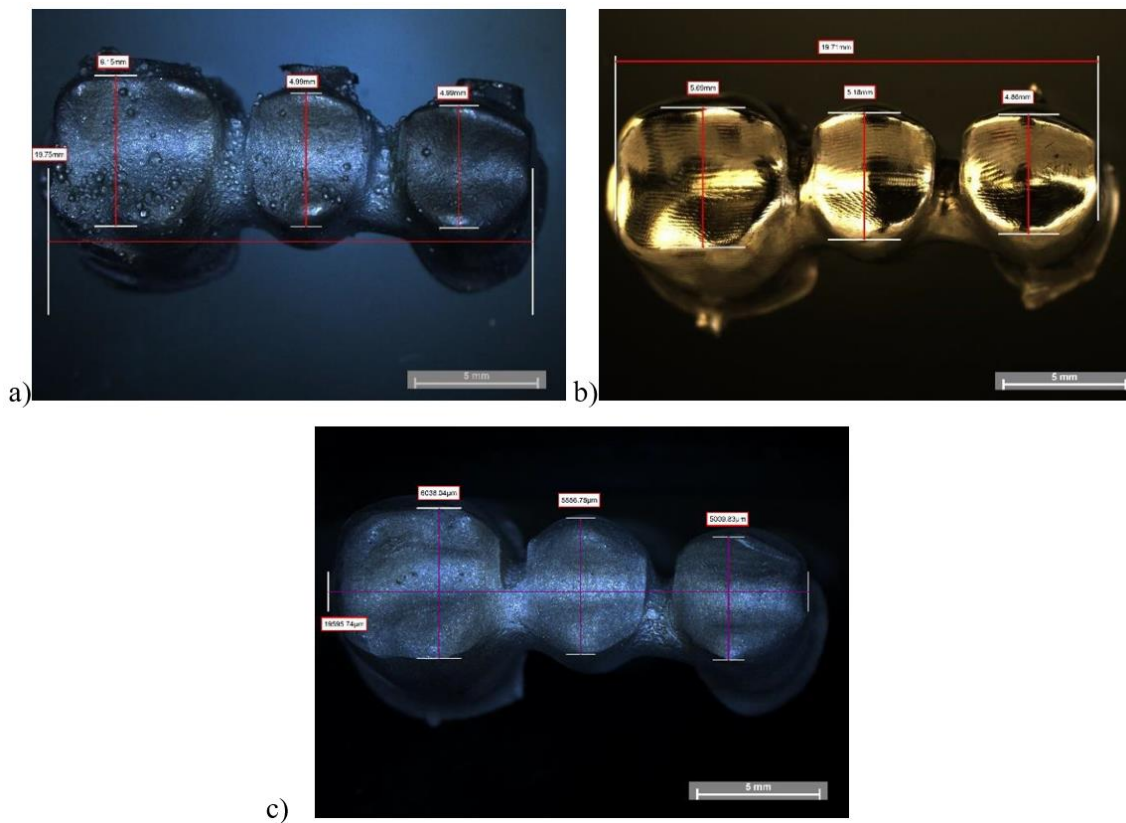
Macroscopic image representing the dimensional analysis of experimental samples obtained by: a) classical casting; b) milling; c) selective laser melting – lower view
